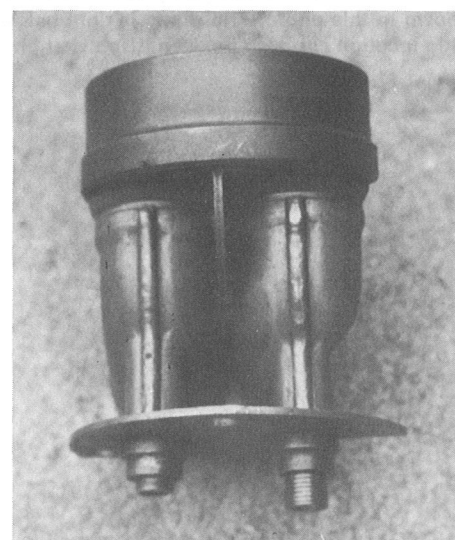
Another view of the cut-away metal fabricated Corvair cylinder and cylinder head assembly. (Bob Helt photo)
